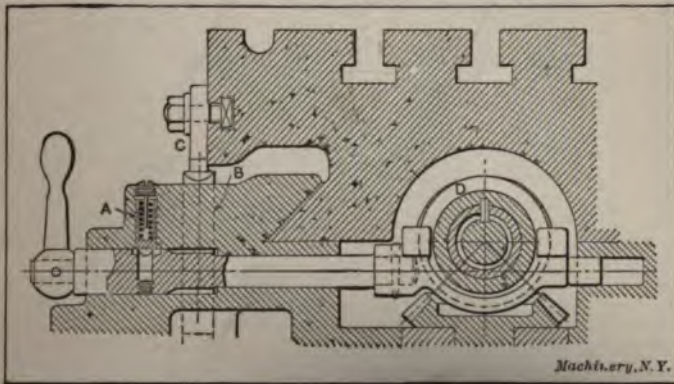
Locking Mechanism for Clutch for Milling Machine Feed-screw
